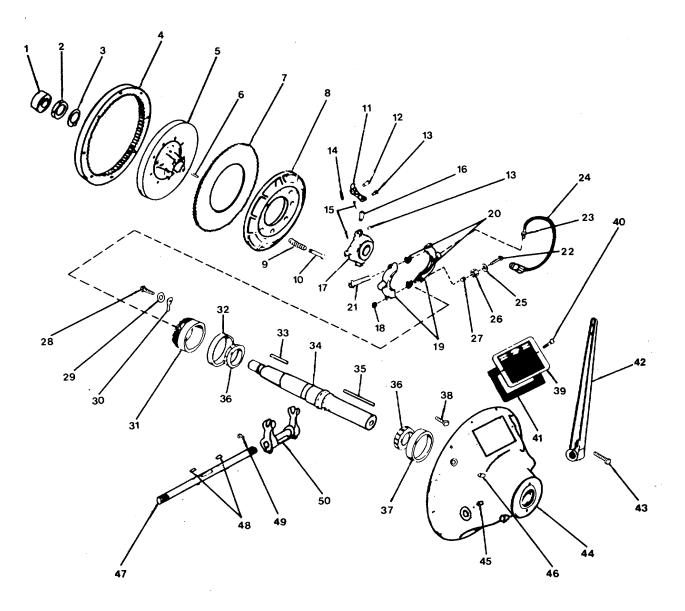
Power Takeoff Assembly (SL-111).
